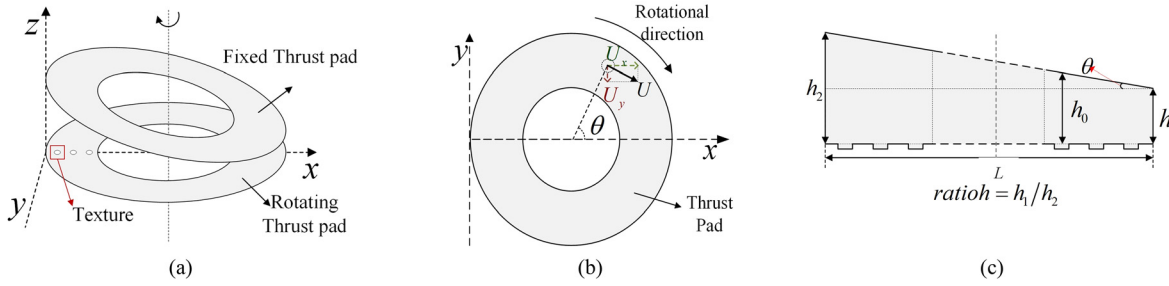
Schematic of thrust bearing. (a) Three-dimensional structural diagram of thrust pad, (b) top view of thrust pad, and (c) front view of thrust pad.
